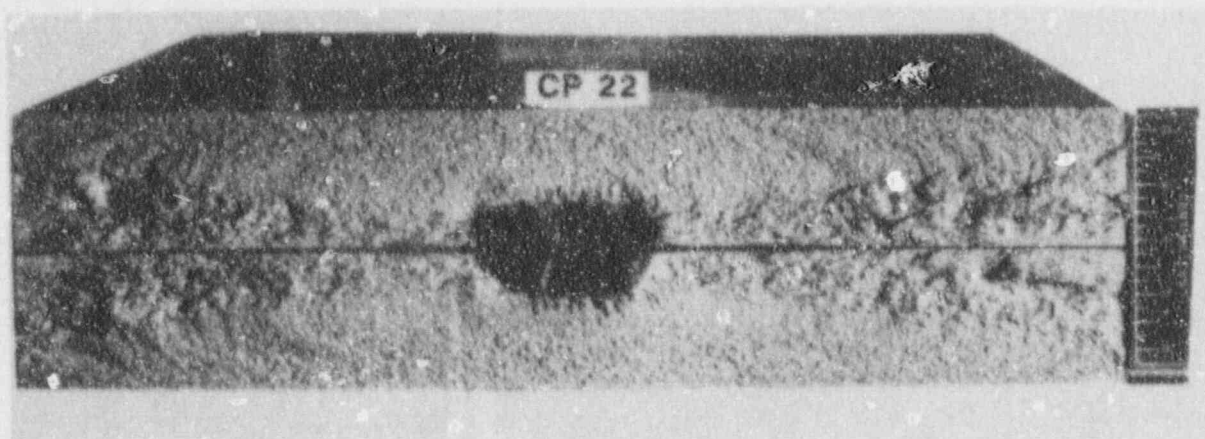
Closeup of the electron beam weld flaw in unclad plate CP-22.
